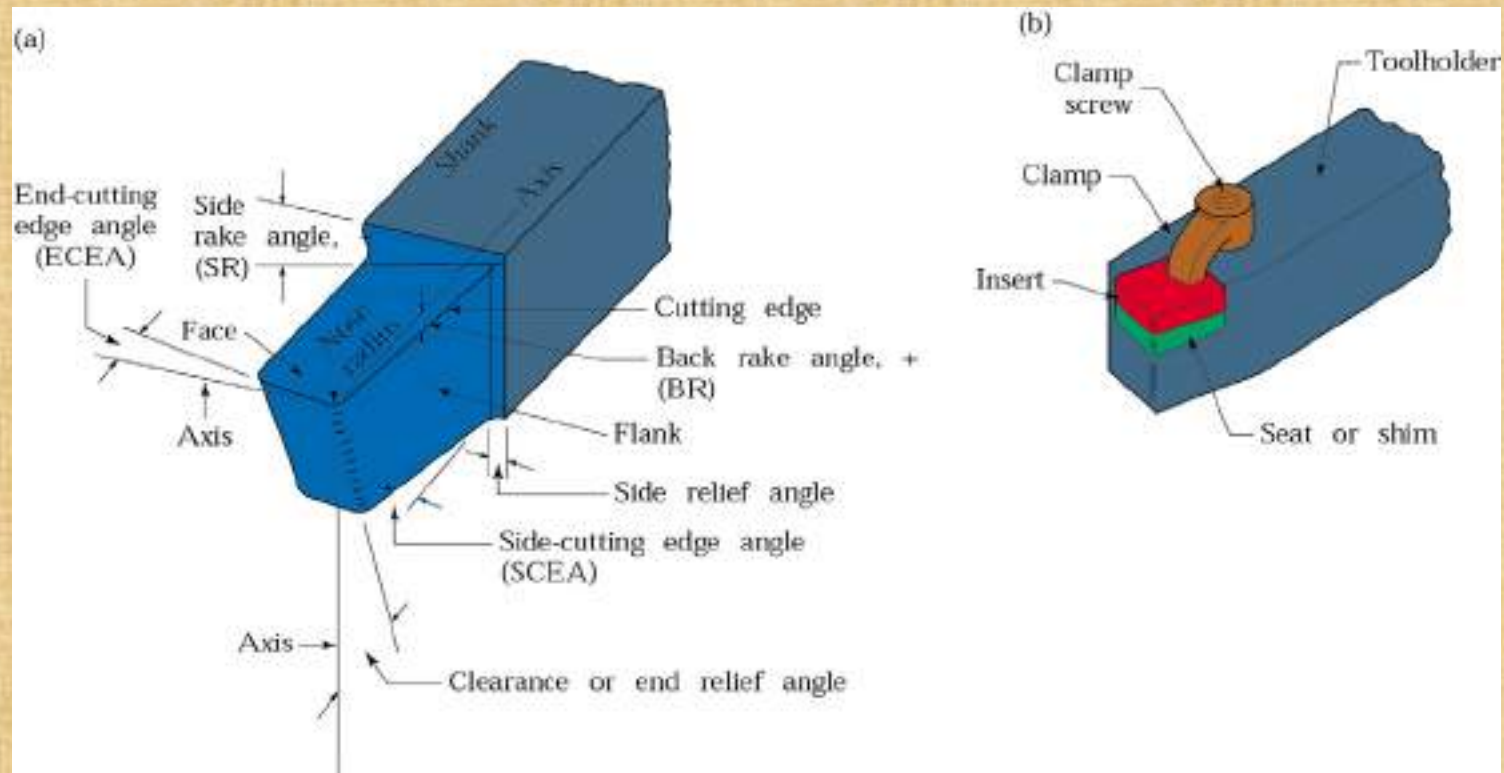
(a) Schematic illustration of a right-hand cutting tool. Although these tools have traditionally been produced from solid tool-steel bars, they have been largely replaced by carbide or other inserts of various shapes and sizes, as shown in (b). The various angles on these tools and their effects on machining are described in Section 22.3.1.
